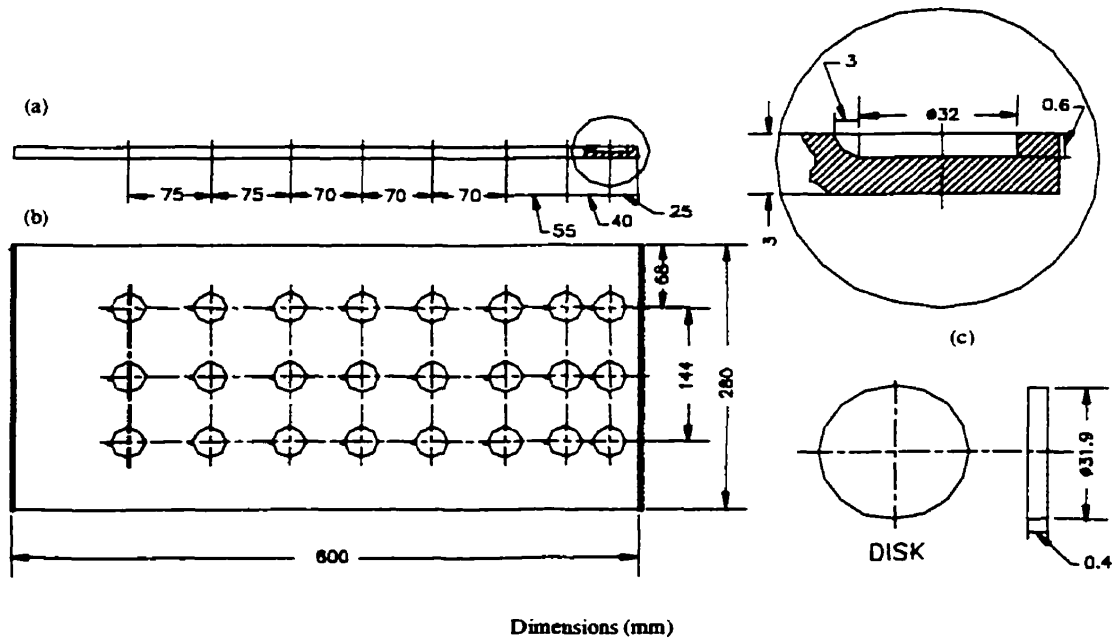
Cold test plate surface (a) side elevation and (b) plan view and their size (c) showing the positions of the removable disks
